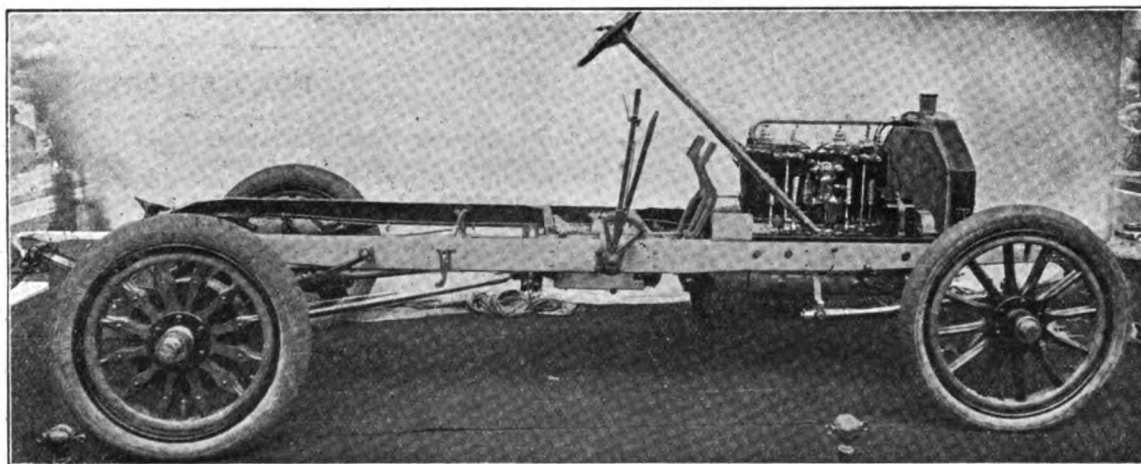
Chassis of Weigel 40-h.p. Car.
